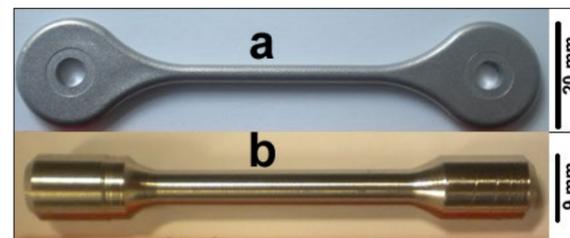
Sintered test samples. a – MPIF and b – machined BS EN 6892
